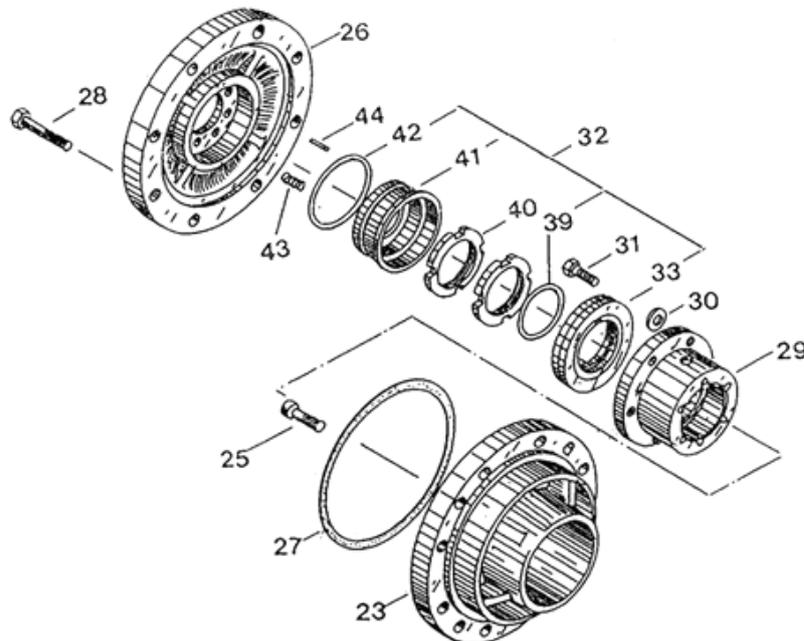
WA-type Shaft Seal Part and Thrust Bearing Part
